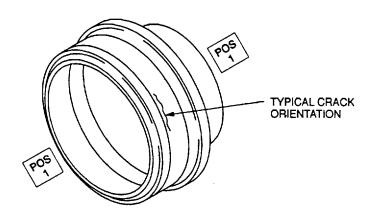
Main Rotor Hub Shield Assembly 2-20
